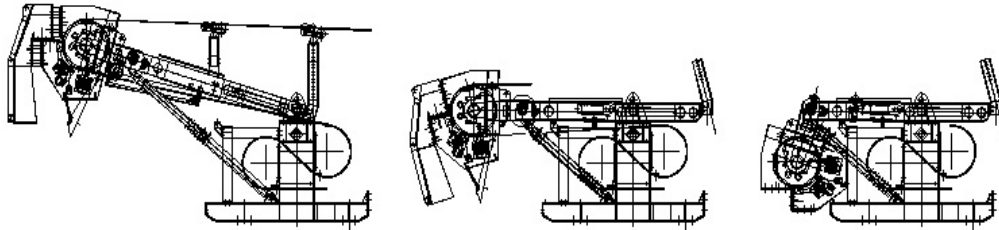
The drive assembly incorporates fork tyne pockets in the base frame so that the unit can be easily carried into position underground before the unit is deployed.
